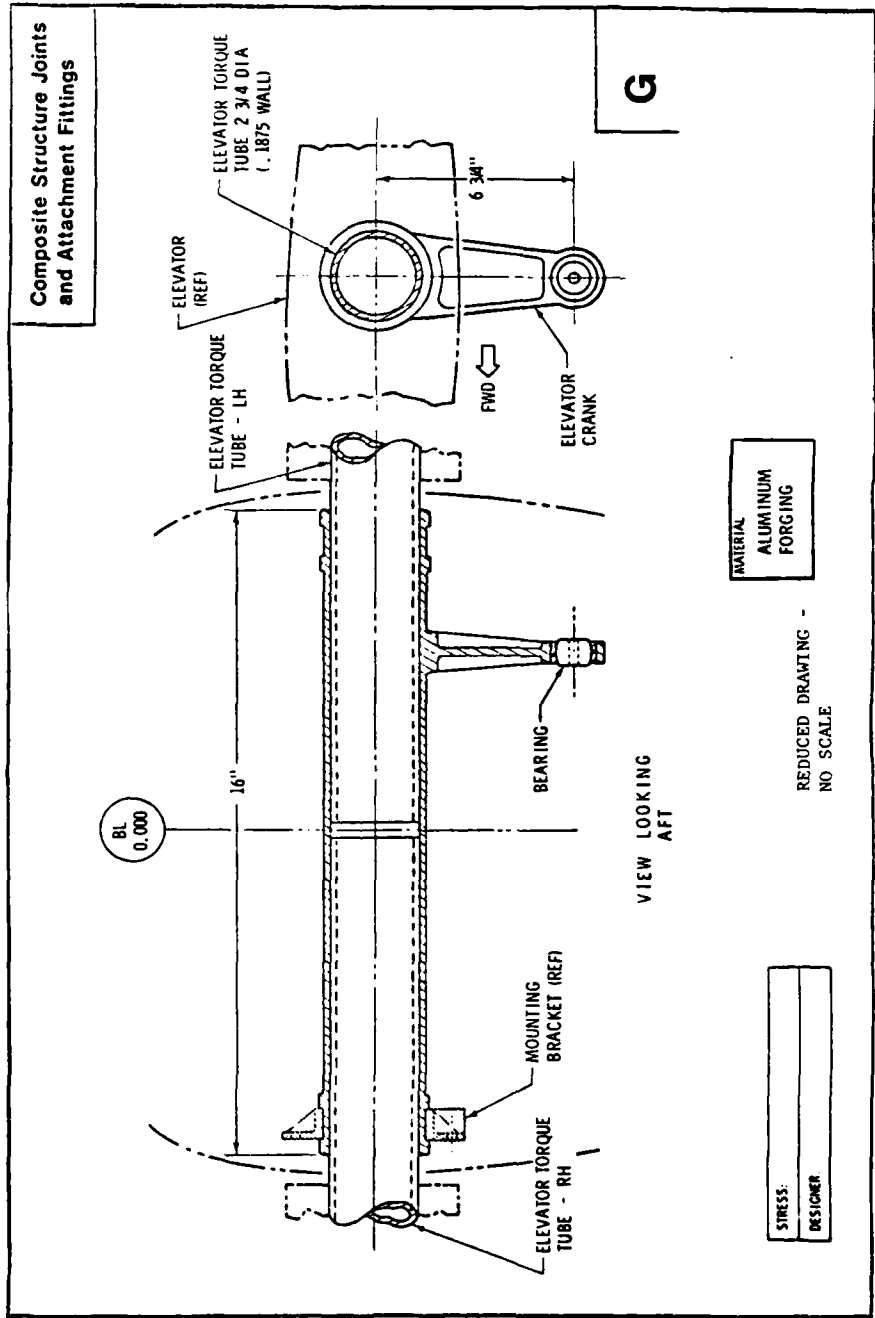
Baseline Metal Part Design: Socket Attachment Fitting (Type G)
